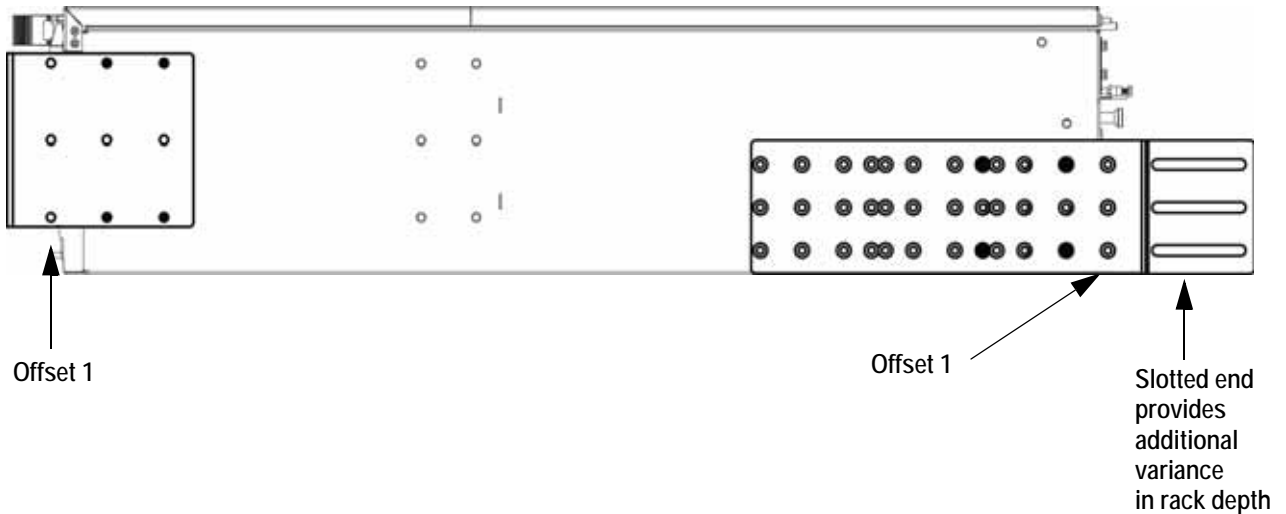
Bracket Mounting for 31" to 32.5" Rack
